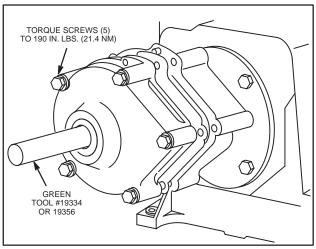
INSTALLING GEAR CASE COVER ASSEMBLY
